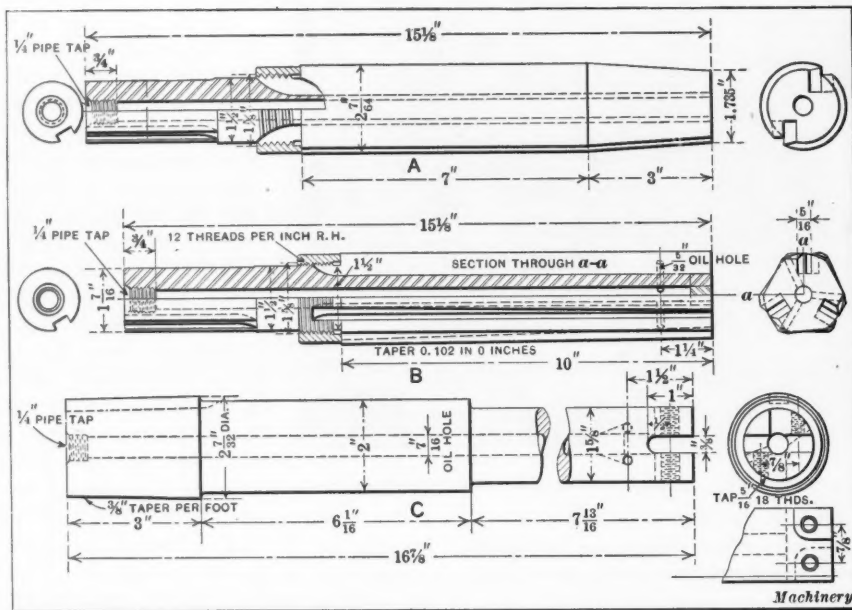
Roughing Reamer, Finishing Reamer, and Inside Finishing Bar
